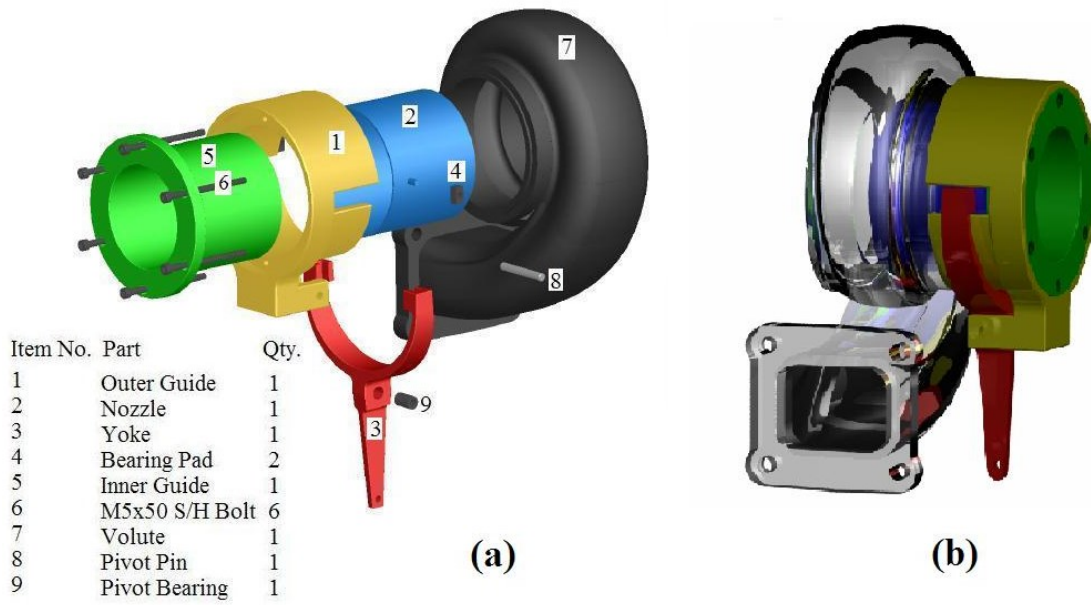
(a) Active control turbocharger exploded view and (b) assembled turbocharger
